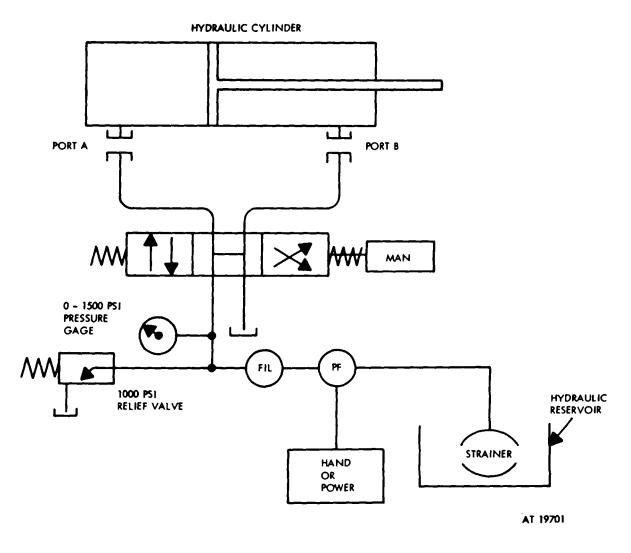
Testing arrangements for hydraulic cylinder and ram.
